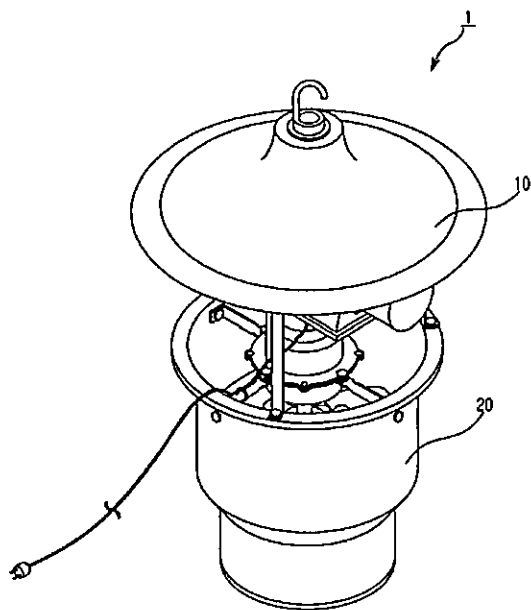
shows a perspective view of an apparatus for capturing insects.
